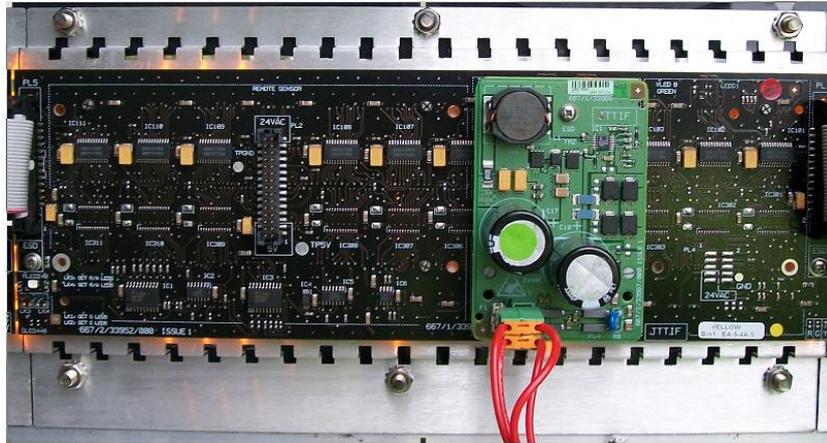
100mm Character PCB Assembly (Yellow) with VLED PSU fitted
